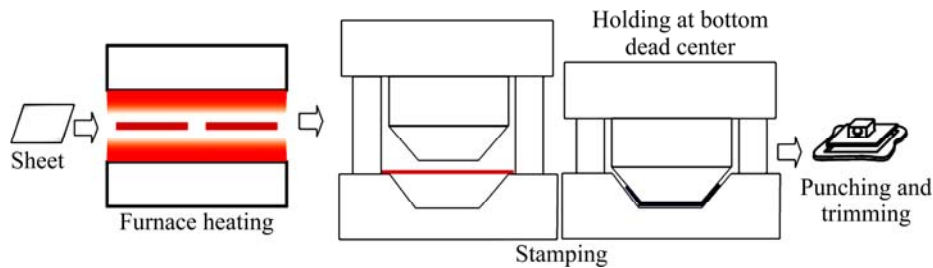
Sequence of hot stamping of quenchant steel sheet
